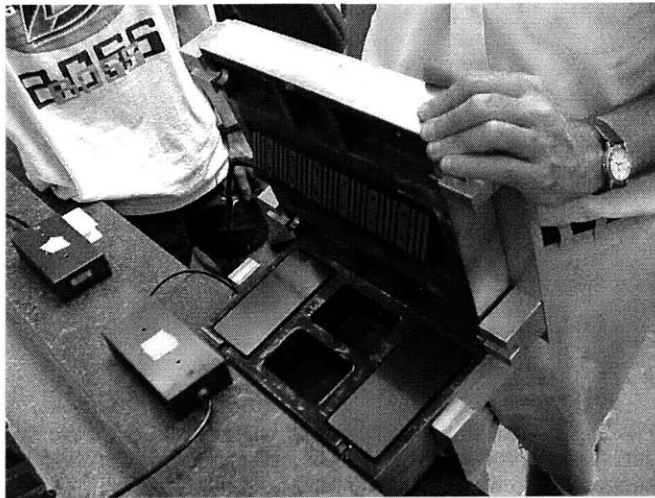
The side bearings placed in their pockets before the carriage is put on the way.
